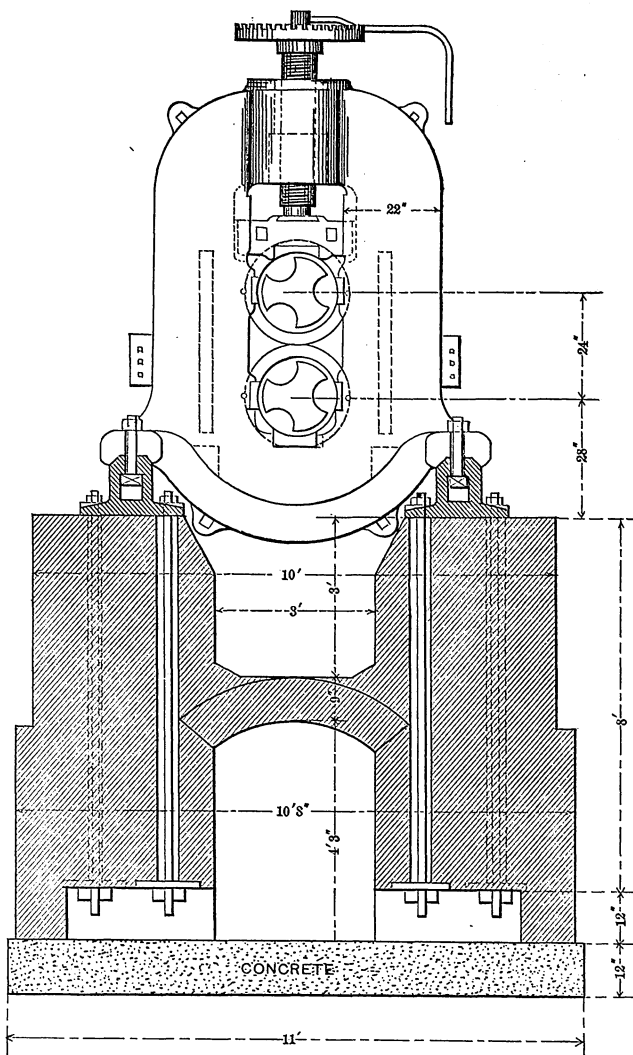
Sheet Mill Housing, Booth Design, 1893.—24-Inch Rolls.—Weight, 23,000 Pounds.
